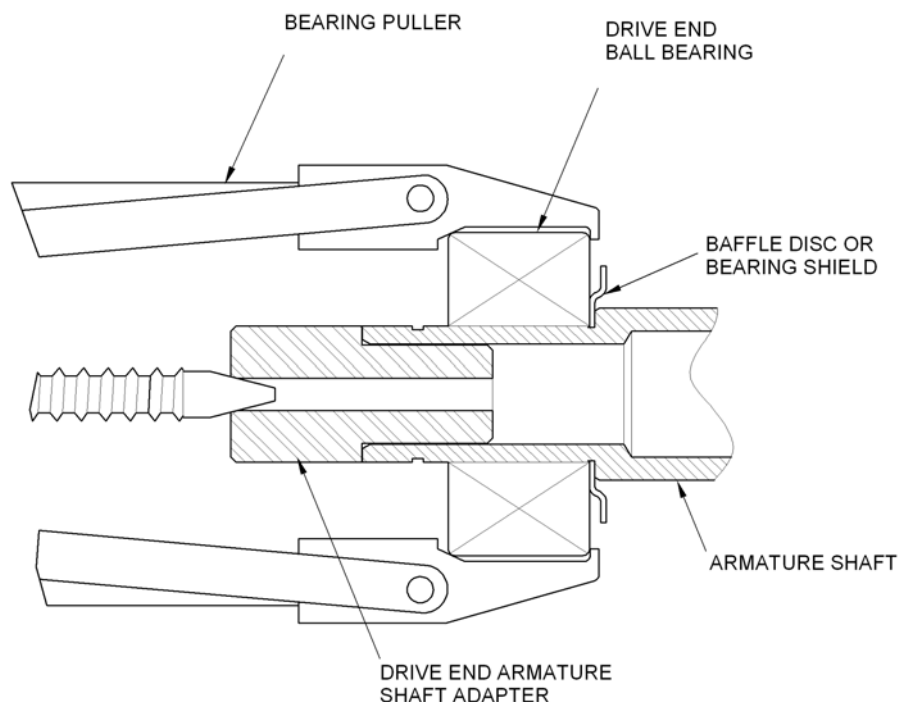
Removing Bearing from Drive End of Armature Shaft
